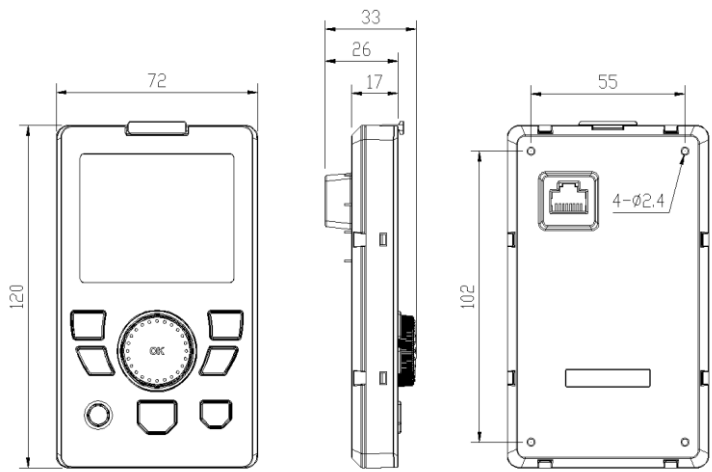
Installation Dimensions of Dual Display External Keyboard (mm)
